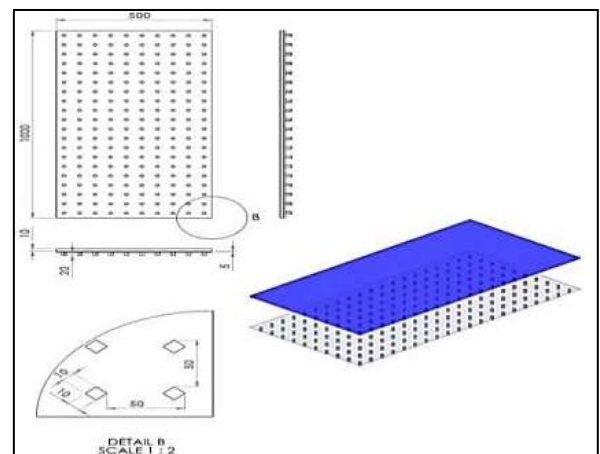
Basic dimensions in (mm) of the panel model with square pin fin cooling module
